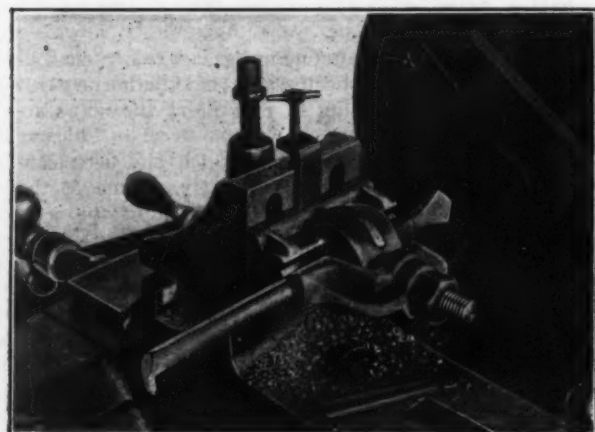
The Krieger Holder Supporting a Boring Bar.
